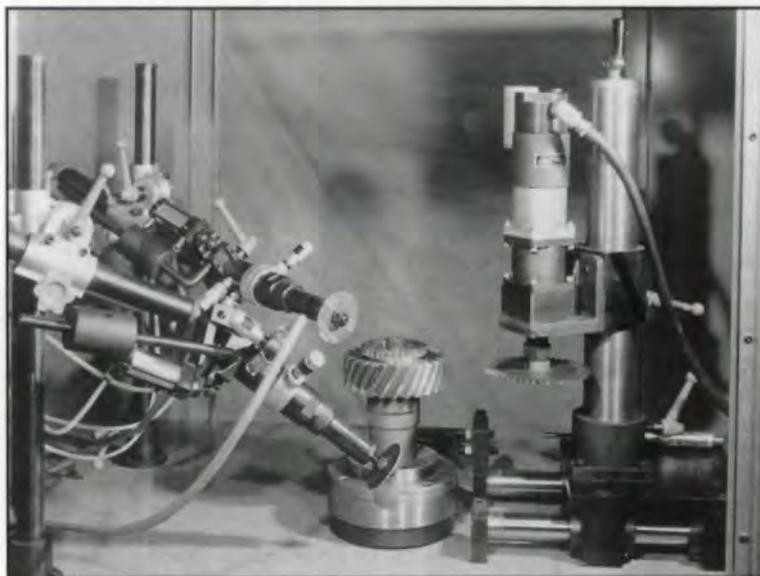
Removing exit burrs with a skiving unit and a grinding wheel.
